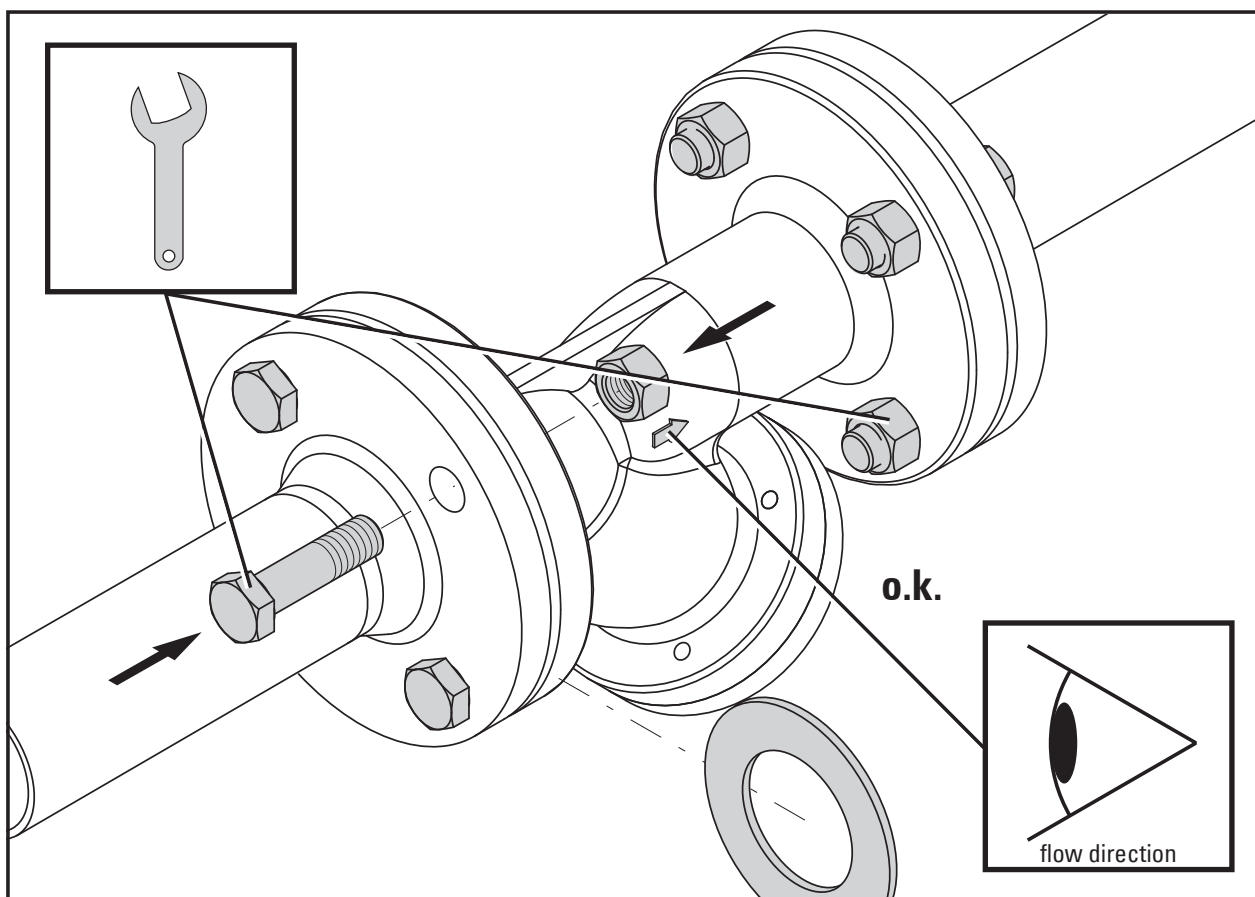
y-strainer, mounting with flanged connections (Fig.: Art. KU3000xx)
